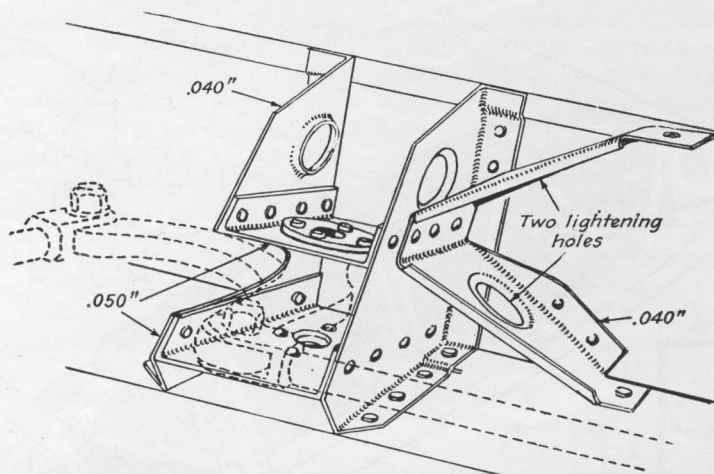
Phantom view of aileron bell-crank push-pull control tube in relation to the pivot bracket, a structure typical of the unusually lightweight sub-assemblies found throughout this craft. Lightening holes are flanged to give added stiffness. Material thicknesses give clues to the light weight possible in these built-up structures.
